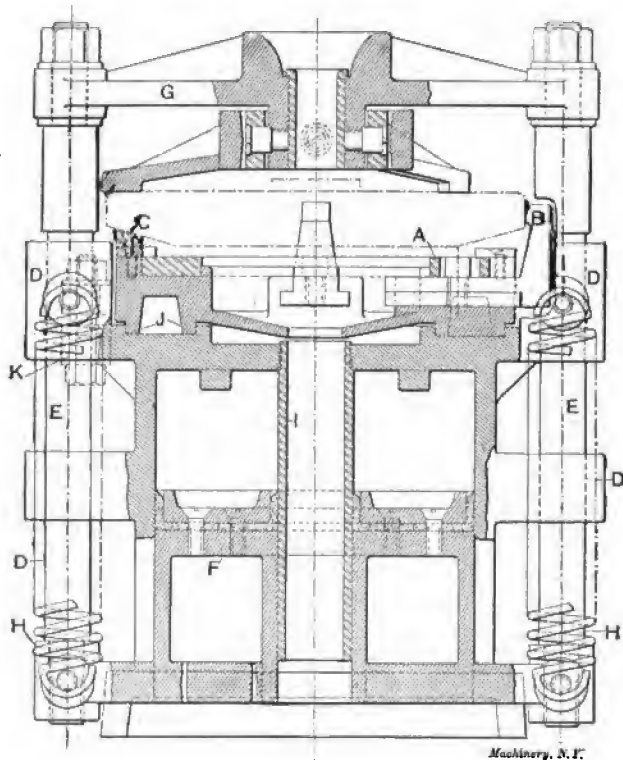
Vertical Section of Pneumatic Clamping Jig
